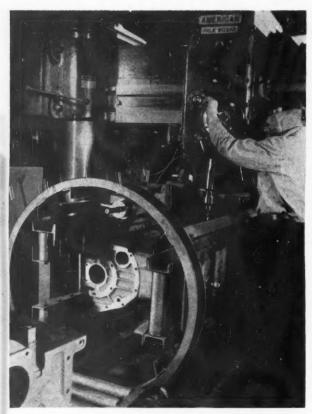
Dowel Holes in Crankcase are Drilled and Reamed with this Radial Drill, using a Turntable-Type Fixture
